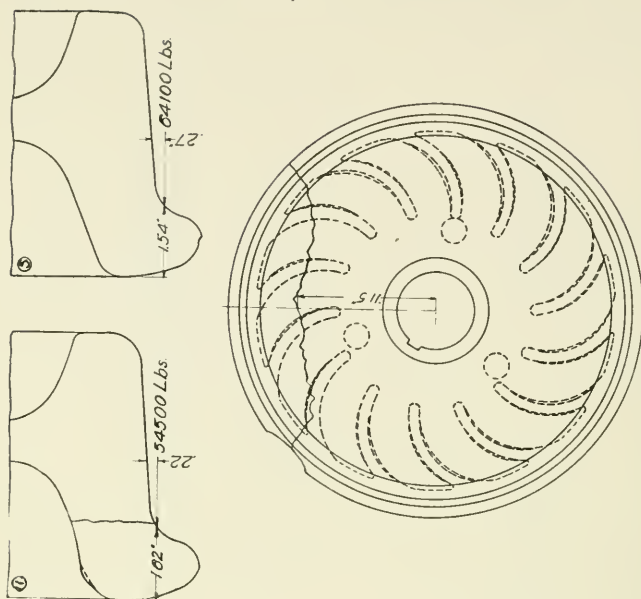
625-LB. M. C. B. WHEEL No. 737 474. THROAT
